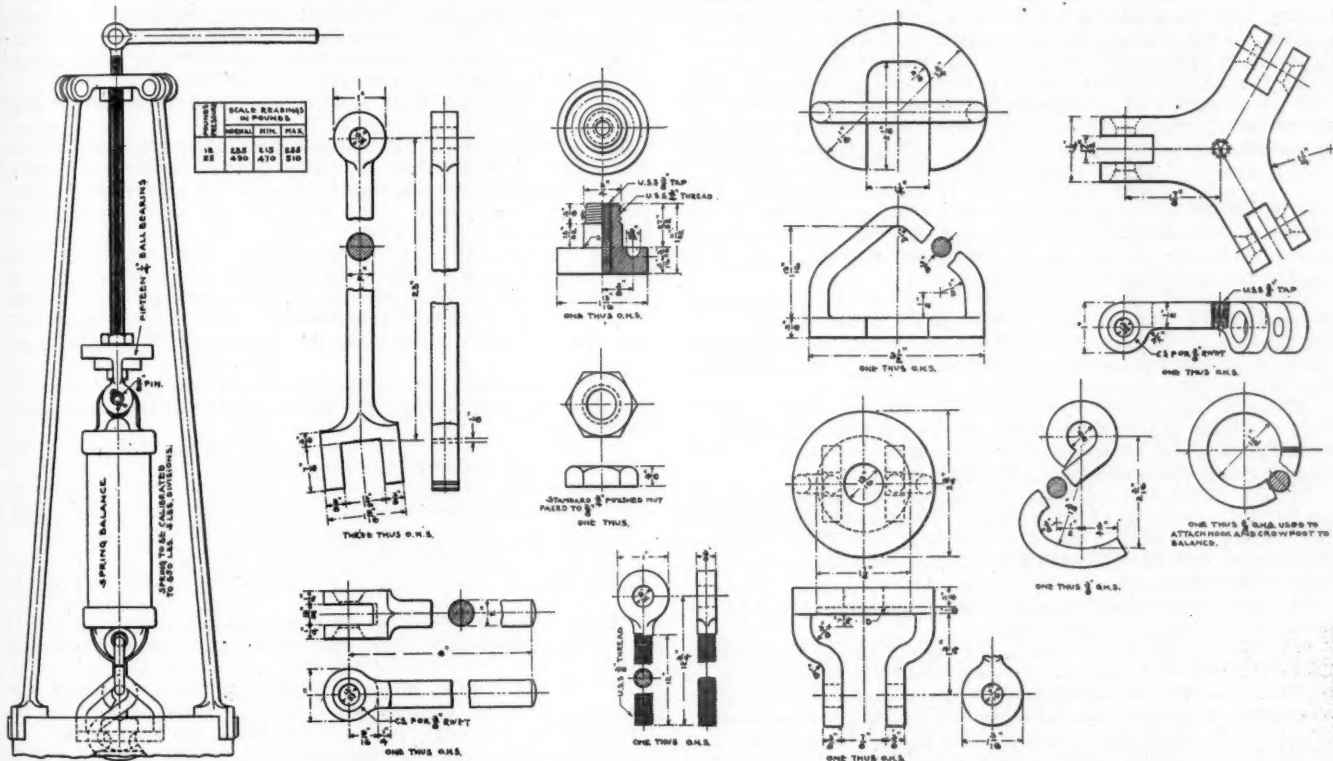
Apparatus for Testing Safety Valves in Place on Car
